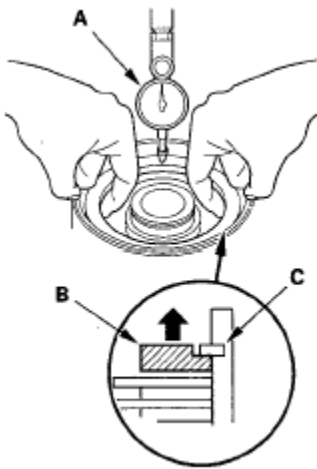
Setting Dial Indicator On Clutch End-Plate
